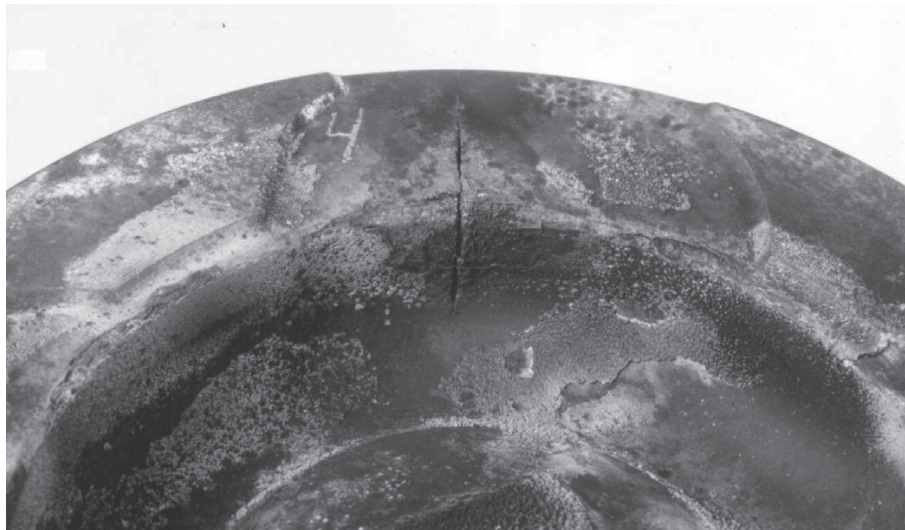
Fatigue crack of open combustion bowl diesel piston at bowl rim edge near pin boss
